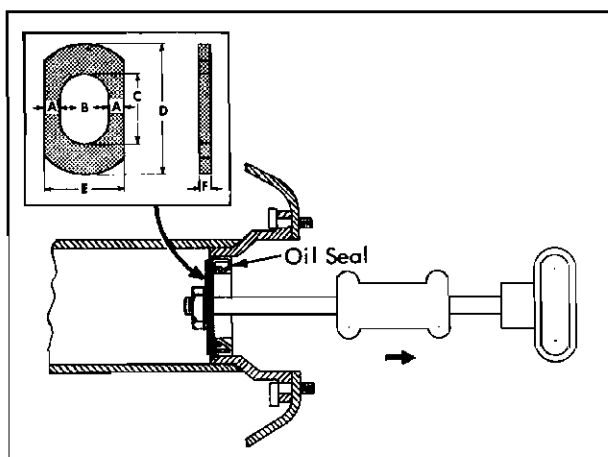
Rear Axle Oil Seal Removal Tool
